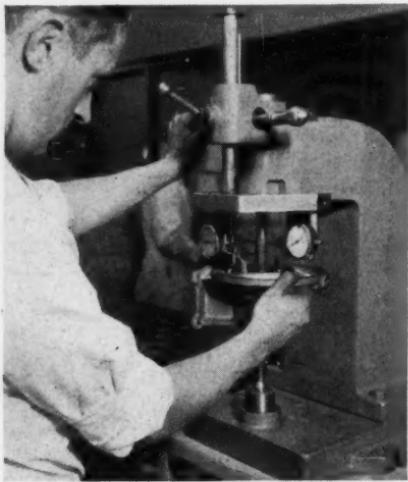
Testing the face of a compressor body for accuracy with the bore.
